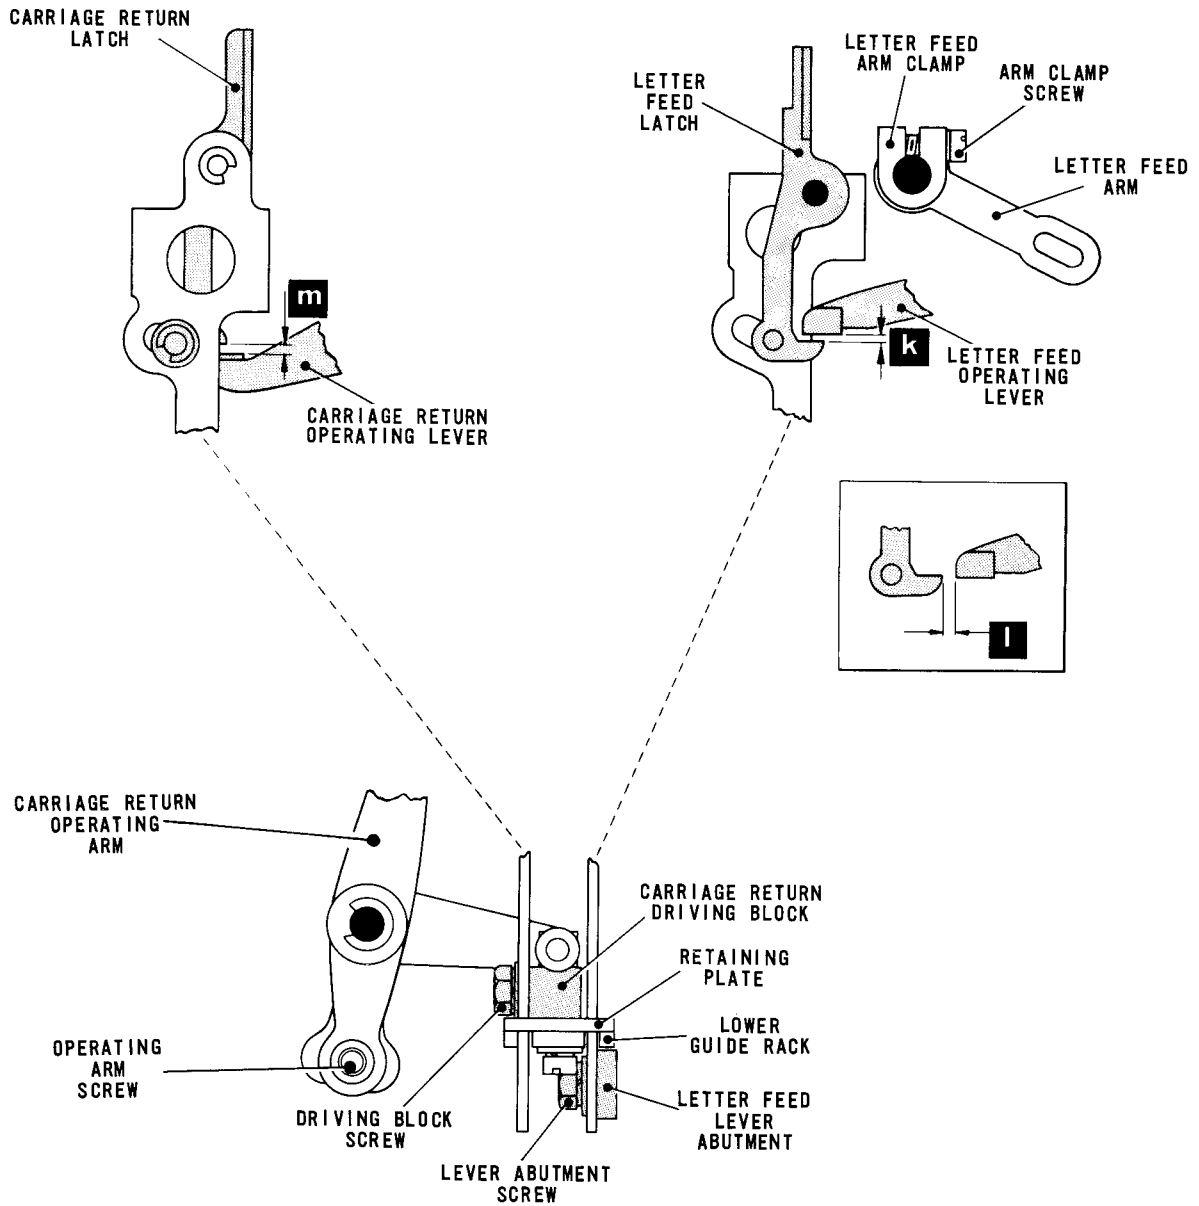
LETTER FEED AND CARRIAGE RETURN CONTROL LINKAGES
